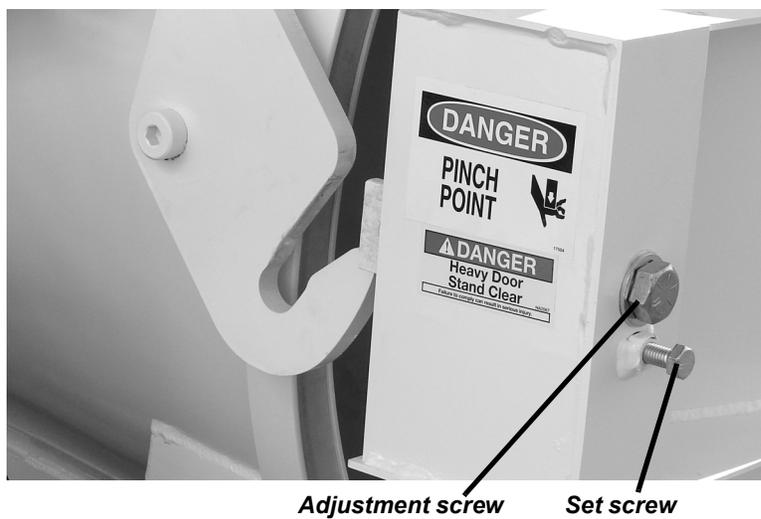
The front of the latch cover has screws for adjusting the latch.
